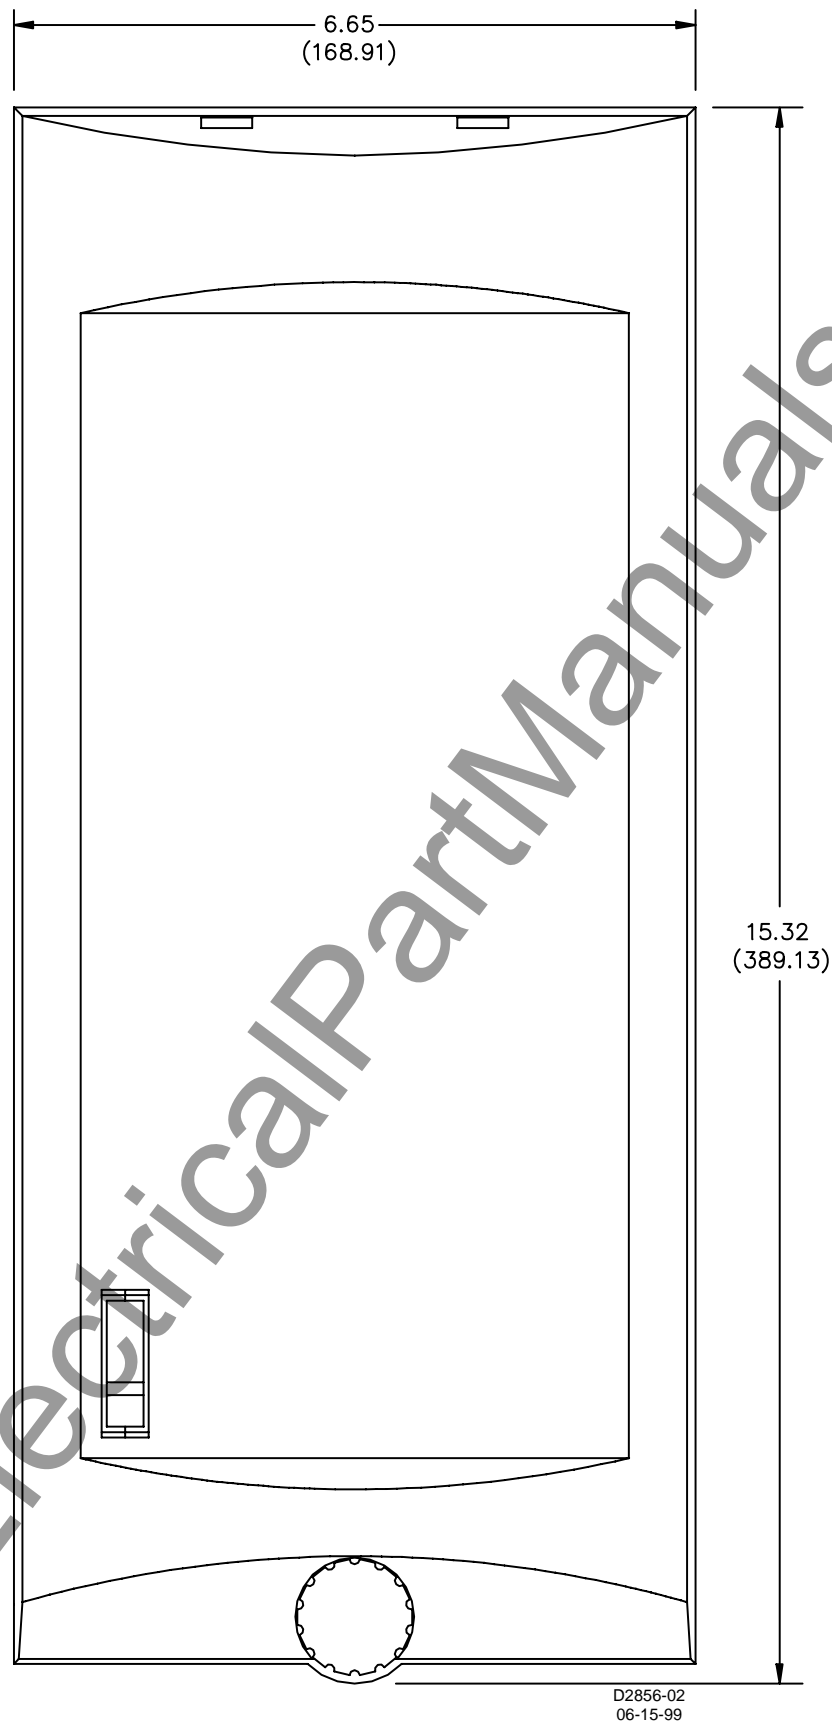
M1 Case (Cover) Dimensions, Front View
